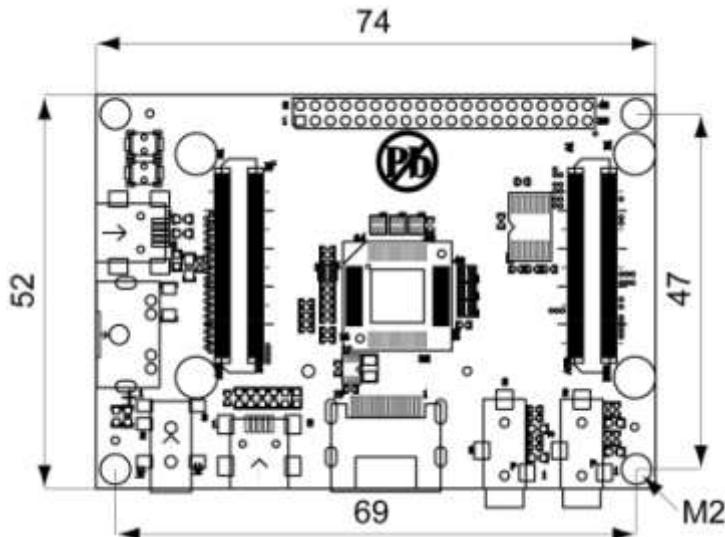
Inferno Baseboard dimensions (Dimensions in mm)
